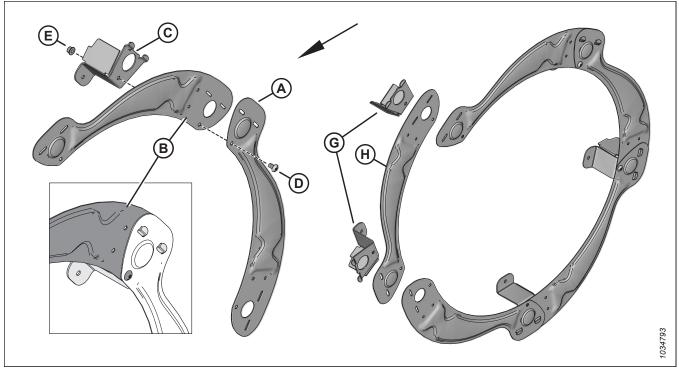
Five-Bat Reel – Initial Endshield Assembly
